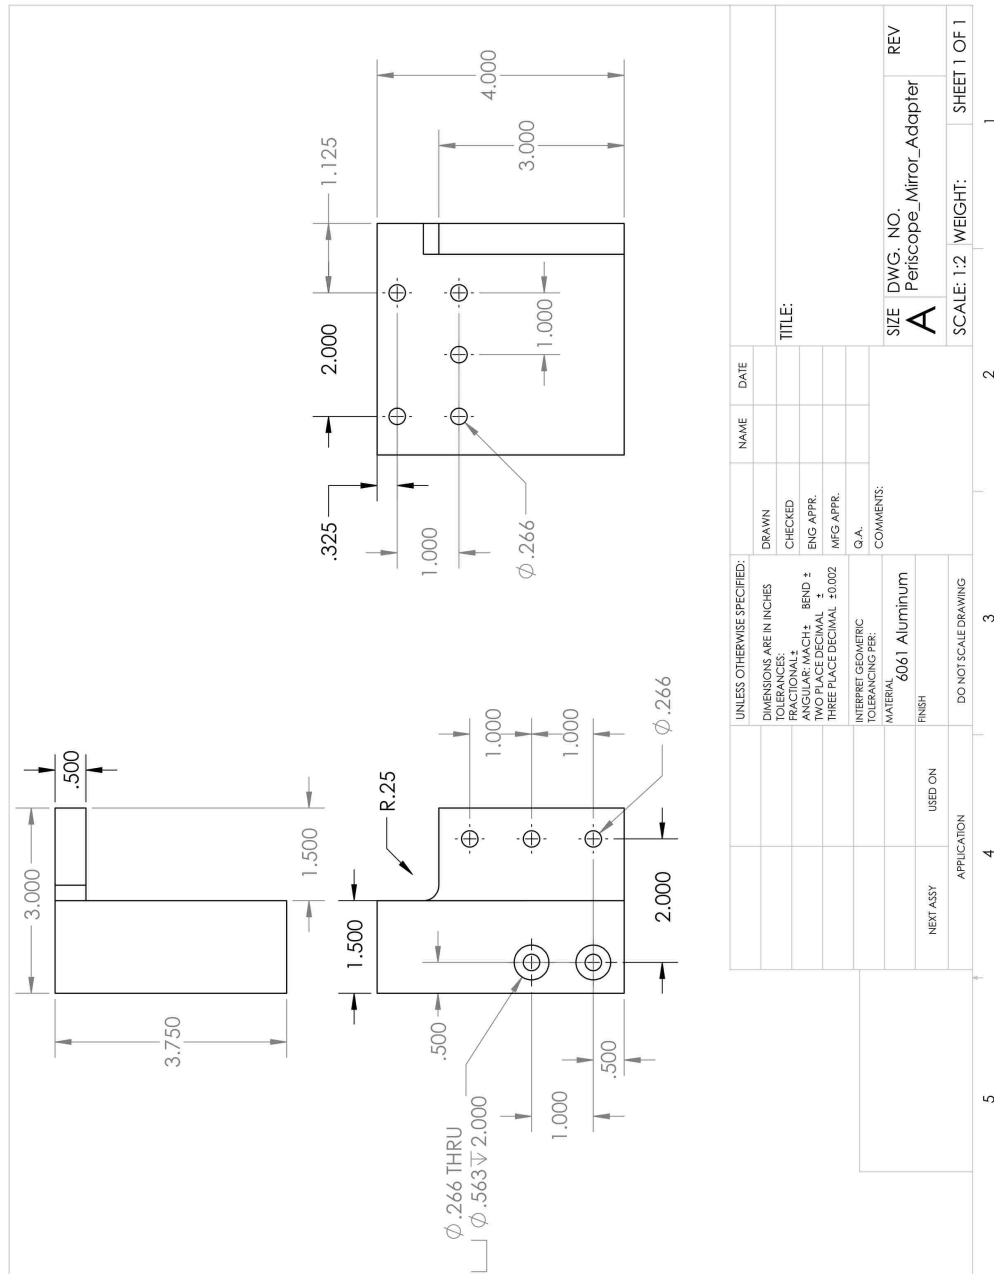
Drawing of the mirror adapter for the periscope mount.
